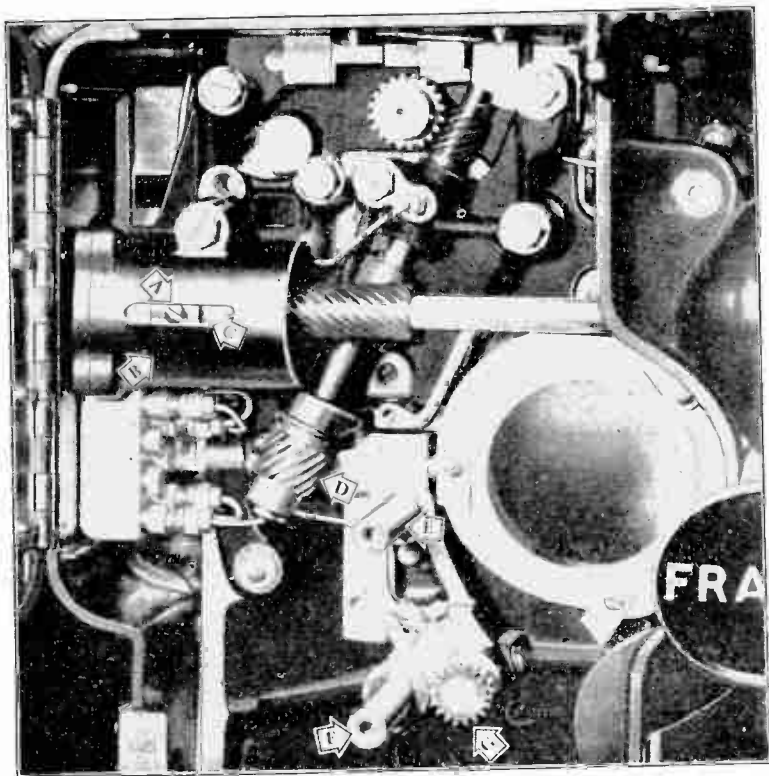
Simplex projector system. In the figure A, represents sliding sleeve guide screw; B, shutter gear sliding sleeve support casting; C, shutter gear sliding sleeve; D, lower gear on oblique drive shaft; E, intermediate drive gear stud; F, main drive gear stud; G, lower sprocket driven gear.
